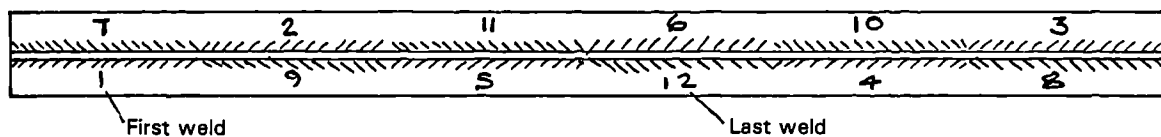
Welding sequence for design-loaded test beam
